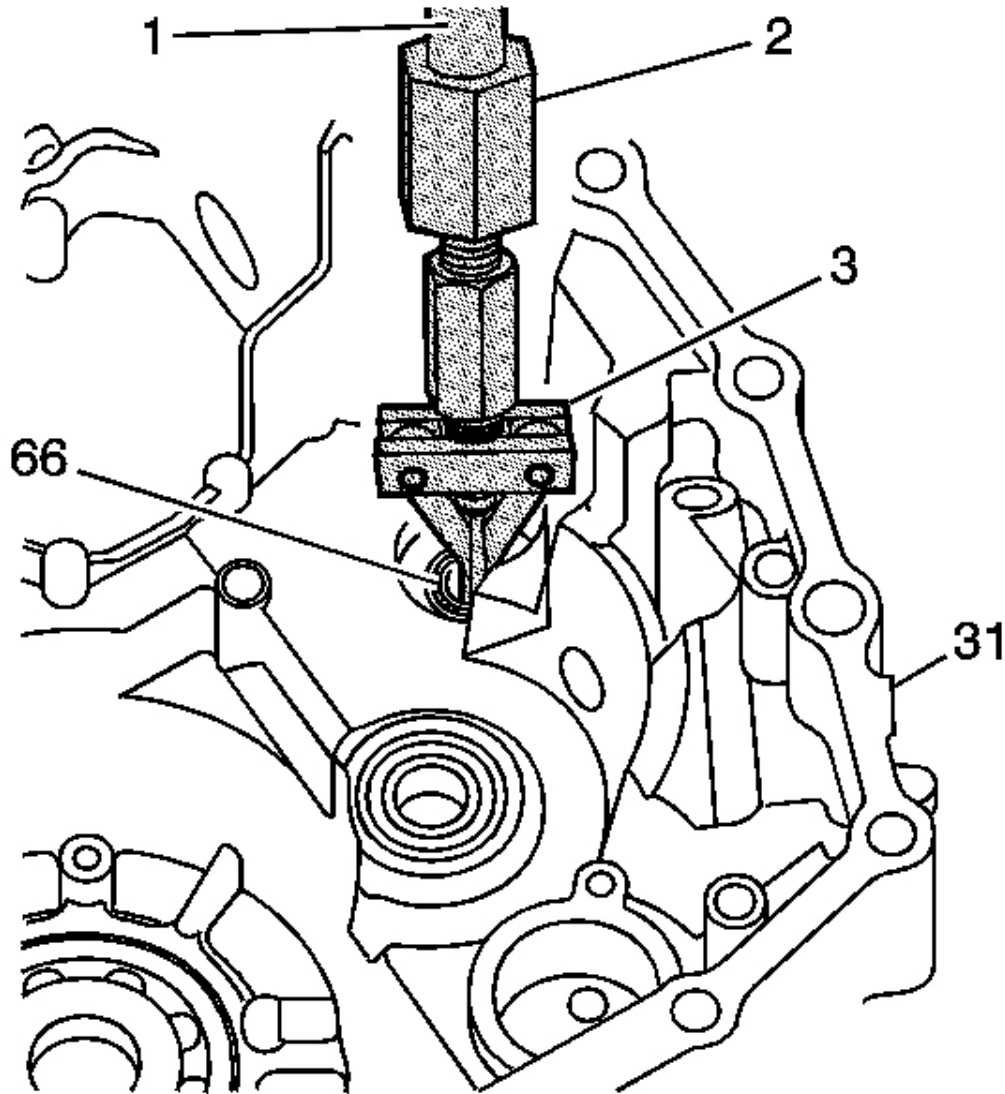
Remove Manual Shift Shaft Bearing Using DT 46424, SA9133T & SA9133T-1
